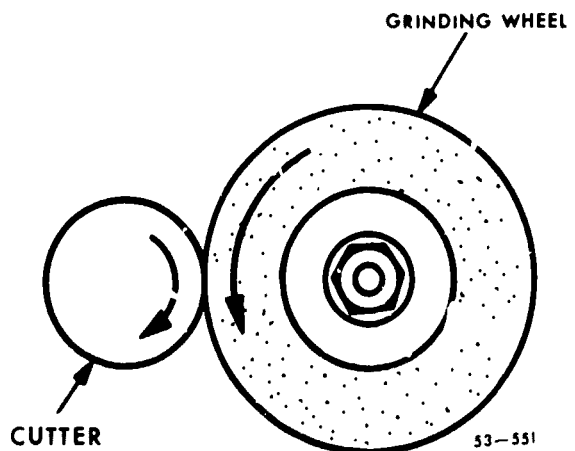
Wheel and cutter rotation for cylindrical grinding
